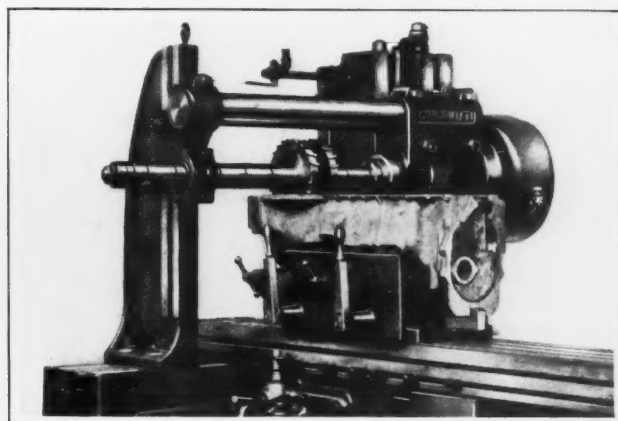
Machine Equipped for Milling Cap Seats on Aluminum Crankcase
